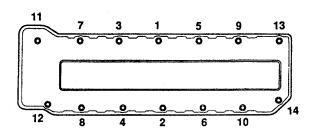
D12, D12A, D12B Valve cover tightening sequence
